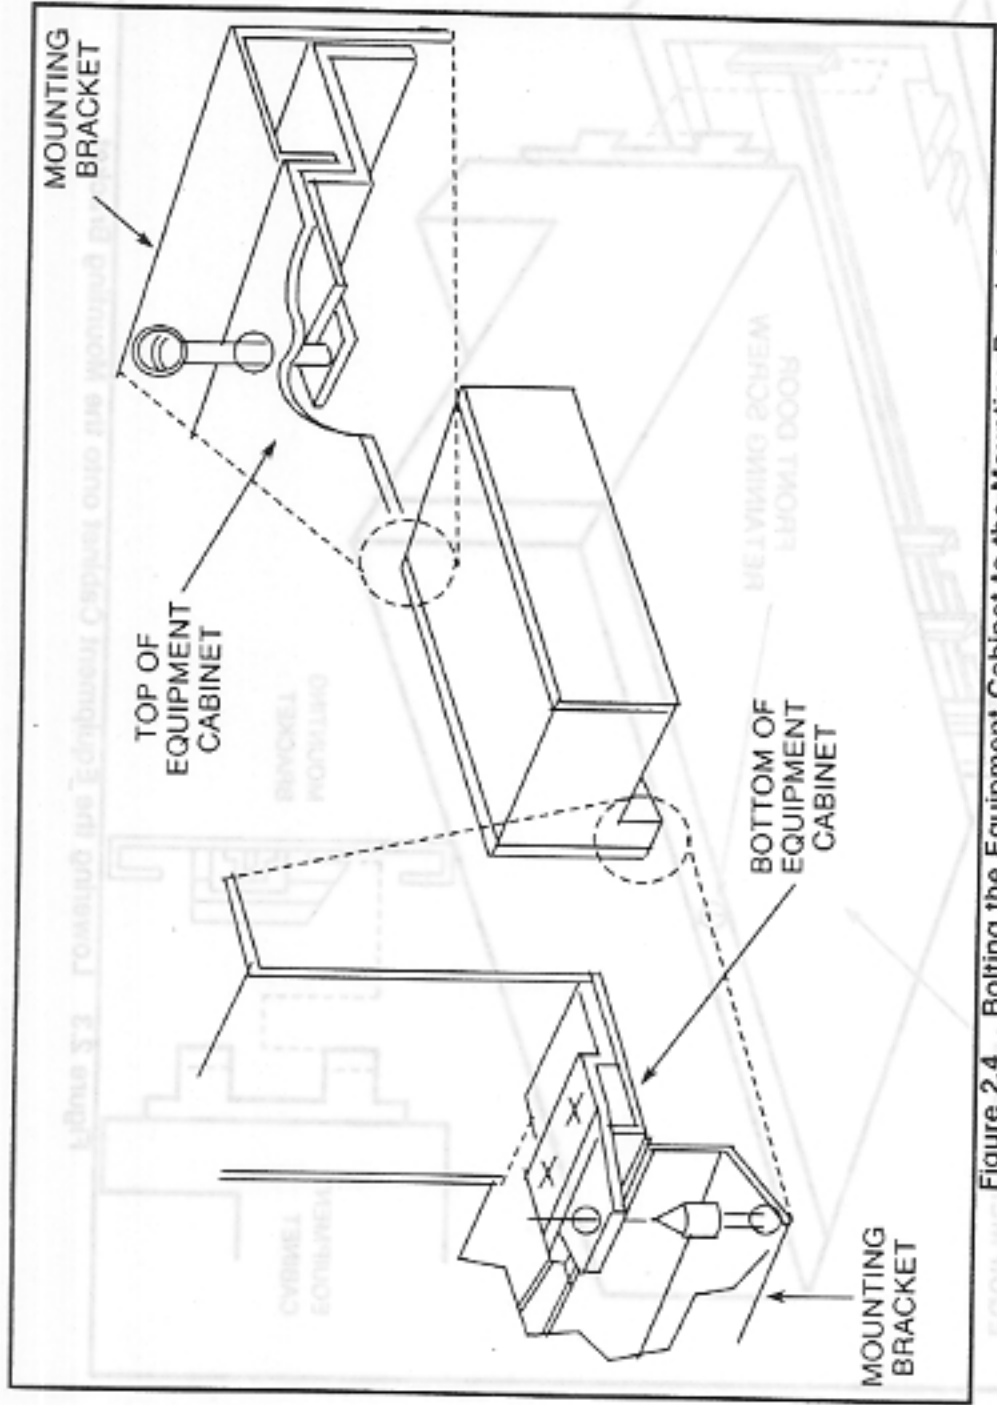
Bolting the Equipment Cabinet to the Mounting Bracket
